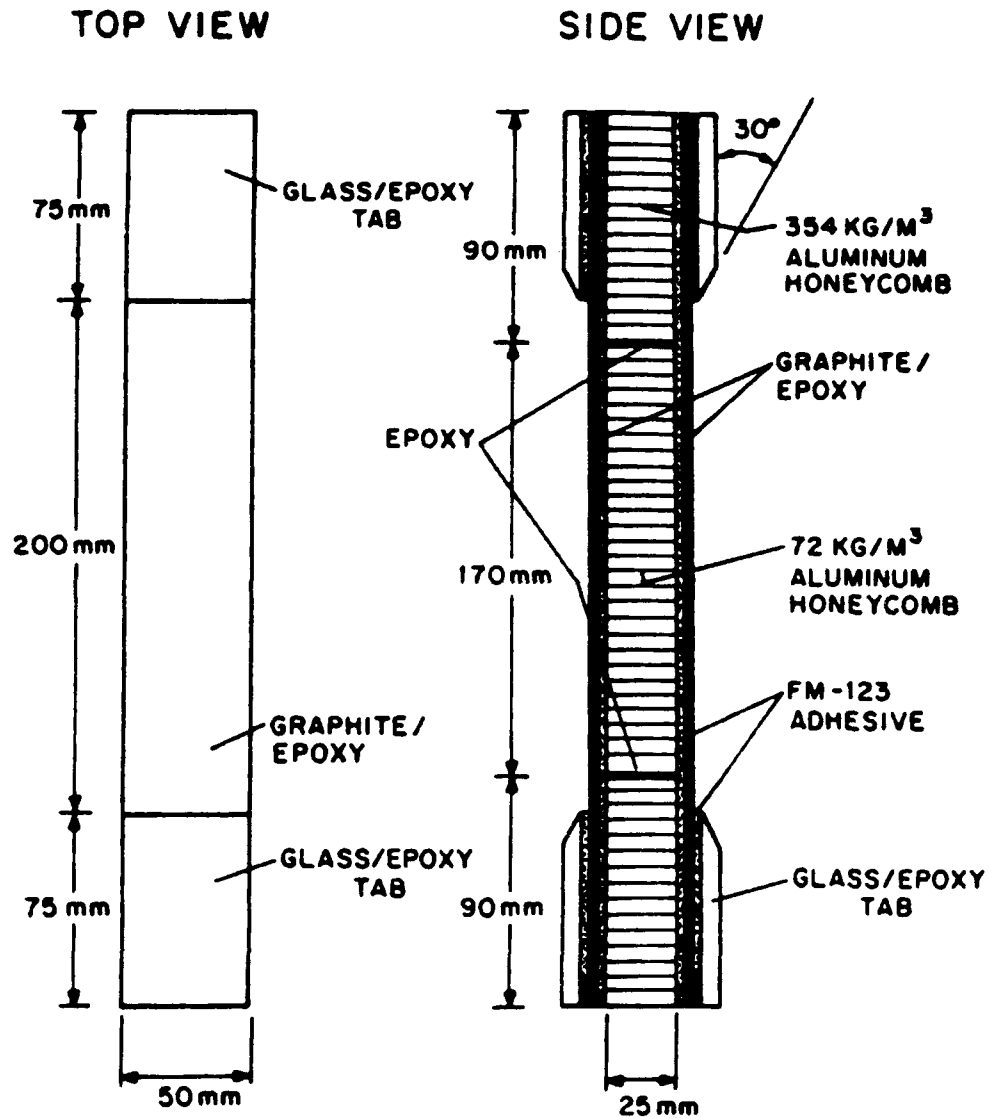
Schematic of the Sandwich Column Compression Test Specimen as Developed by Lagace and Vizzini [67]
